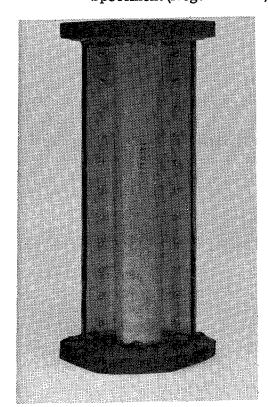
Stringer Side of Typical Riveted Crippling Specimen (Neg. 126909B)
